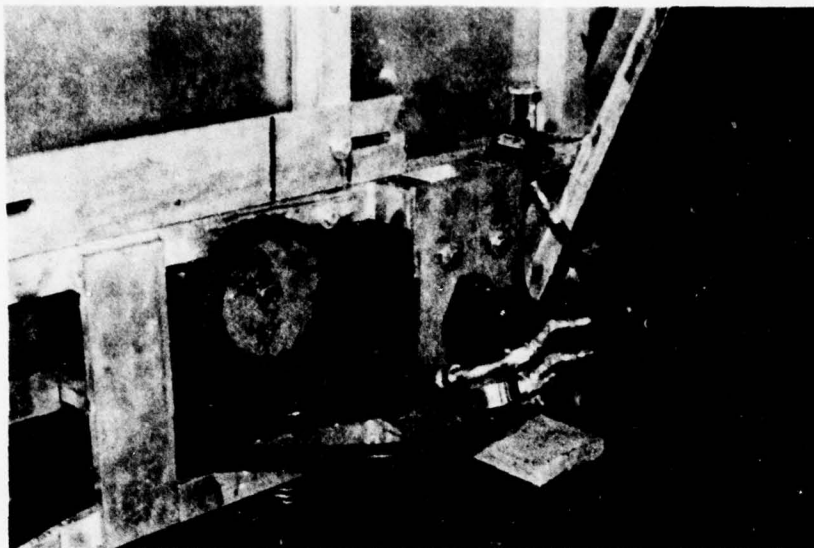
FRONT ROLLER DRIVE ASSEMBLY
